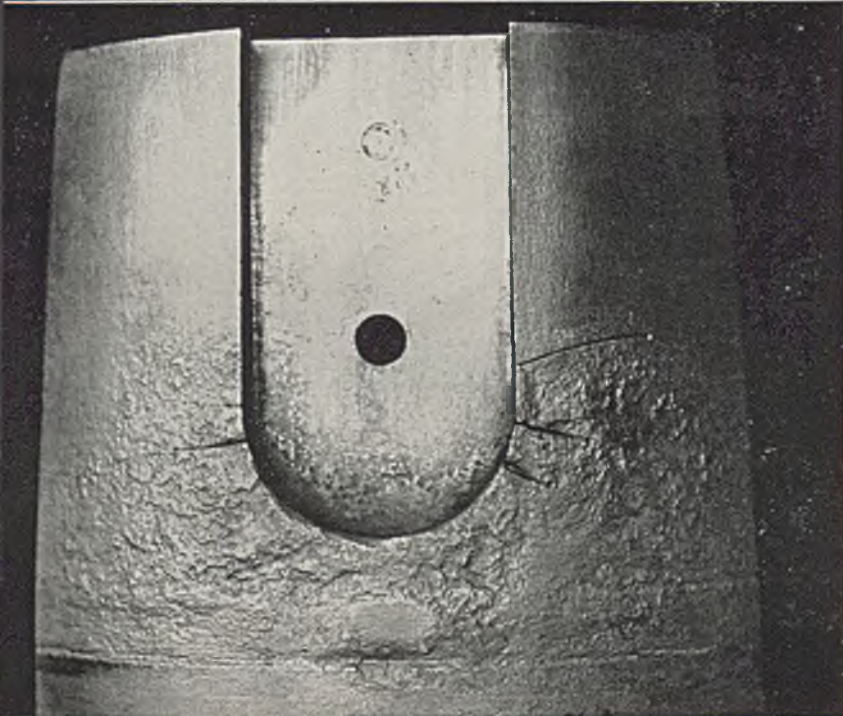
Tail-Shaft Failure due to Sea-Water Evading Rubber Sealing Ring.
